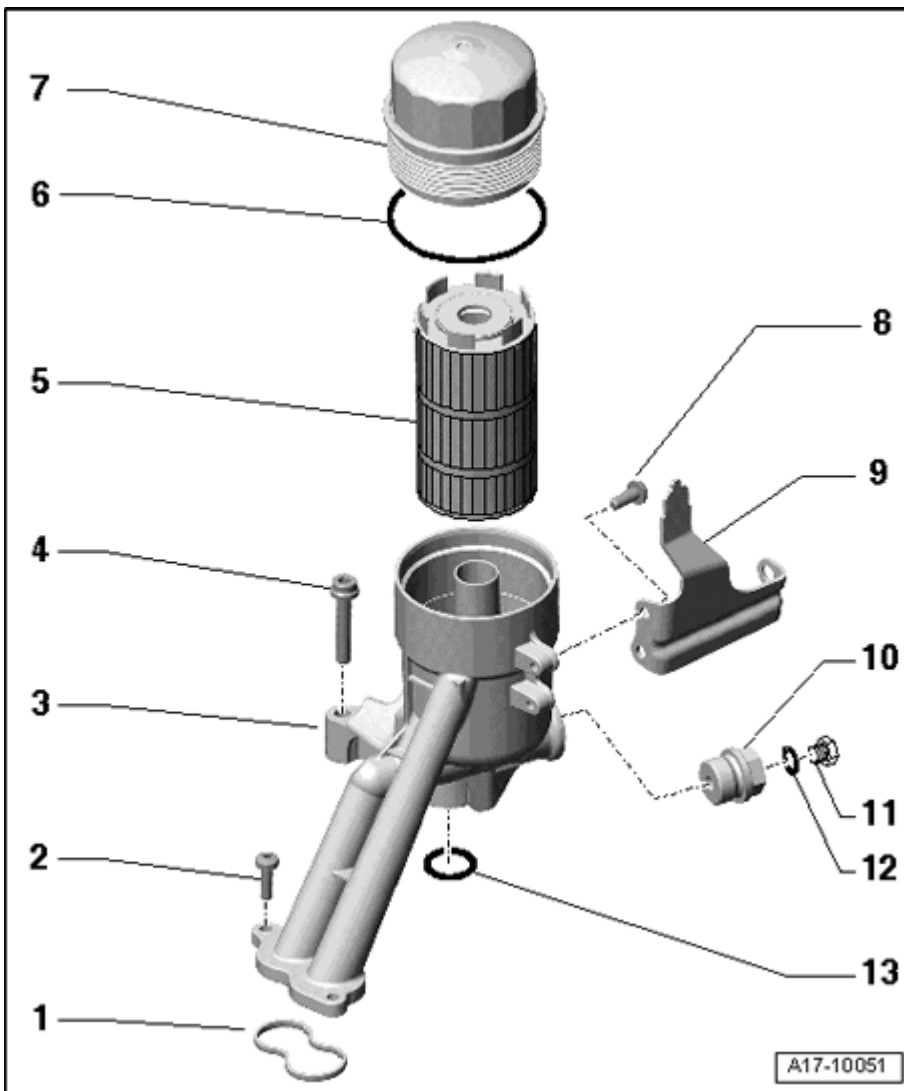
Oil Filter Housing, Assembly OverviewCourtesy of VOLKSWAGEN UNITED STATES, INC.
